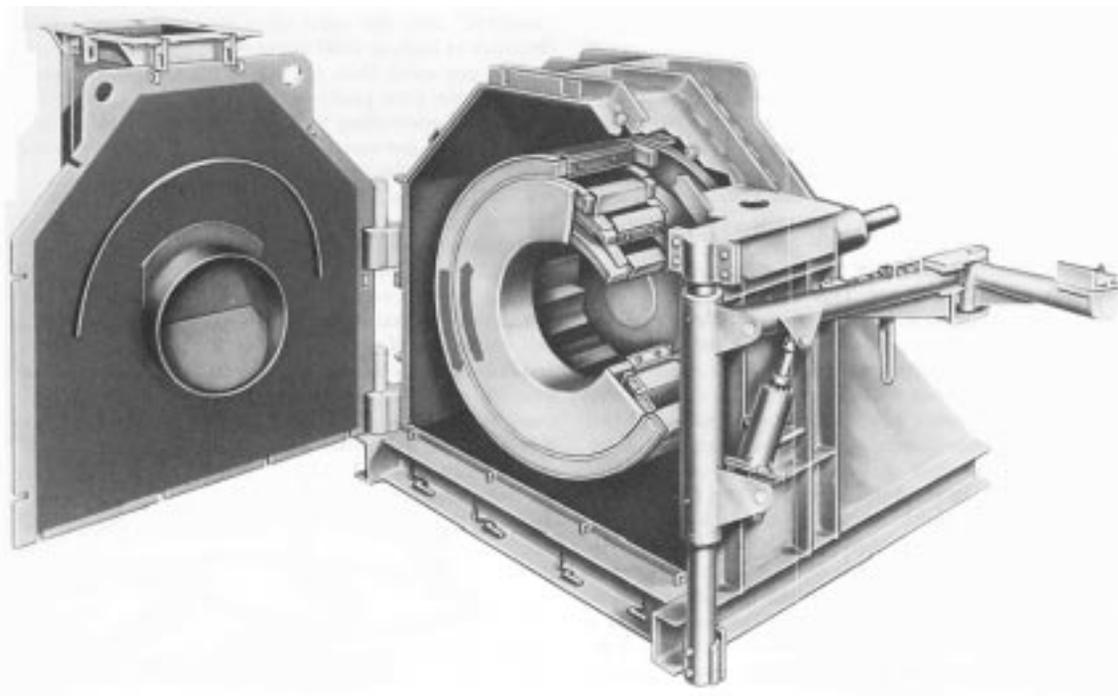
Cut-away view of a cage mill for pulverizing coal.
